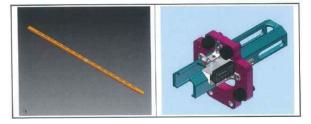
Lancing Equipment Used for Hanul Unit 2
